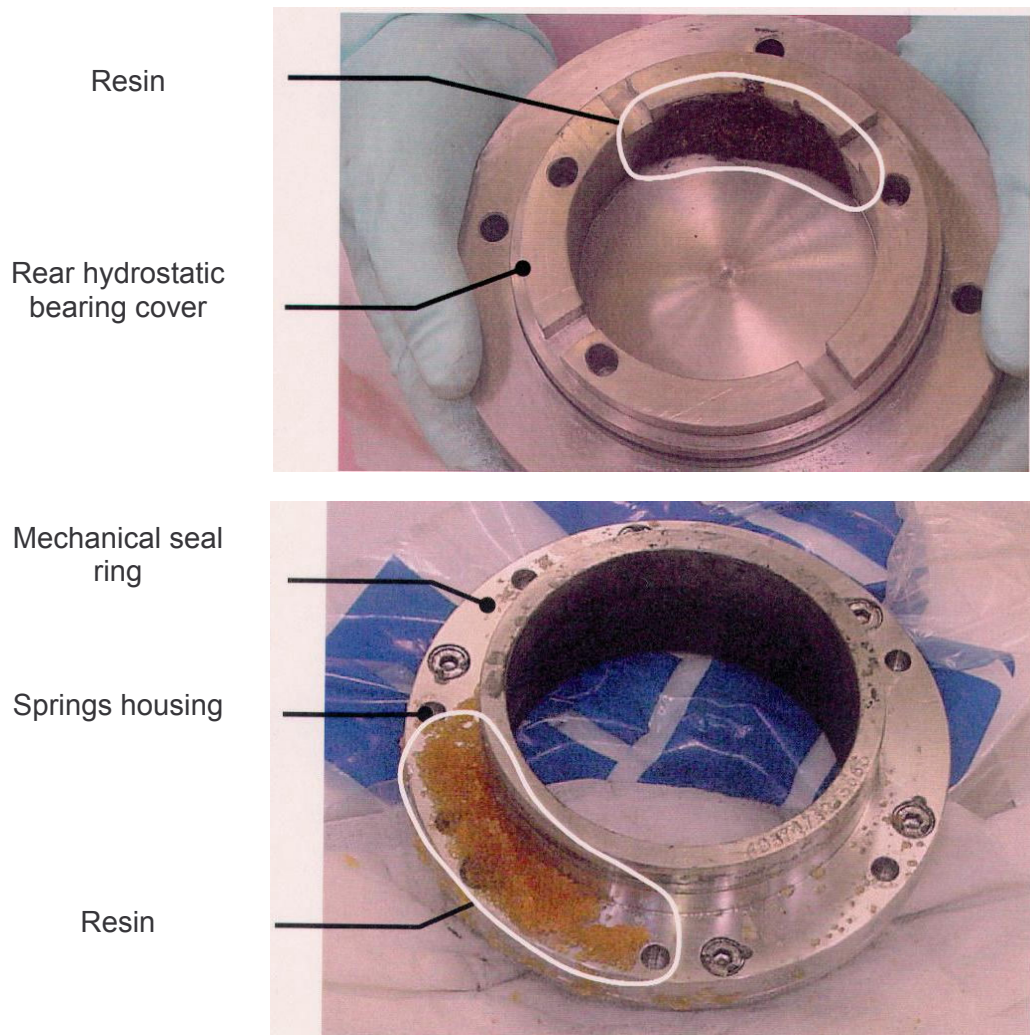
Rear hydrostatic bearing and mechanic seal of the pump CVC02PO
